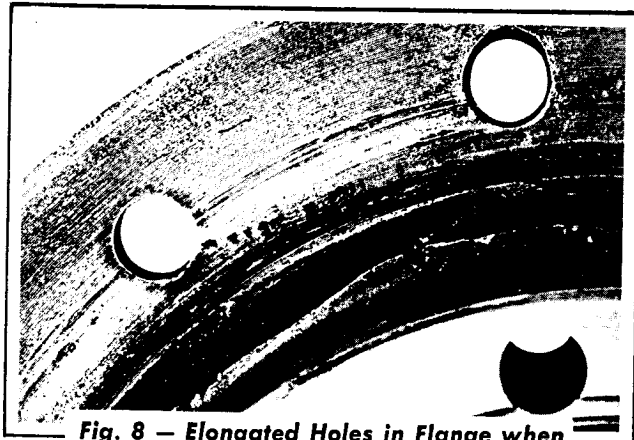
Elongated Holes in Flange when Rivets were Chiseled Out
